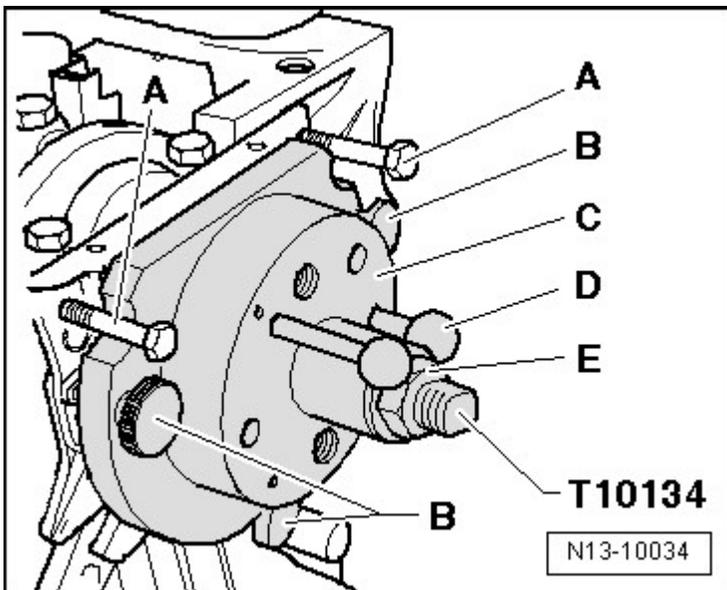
Checking Installed Position Of Sensor Wheel On Crankshaft
